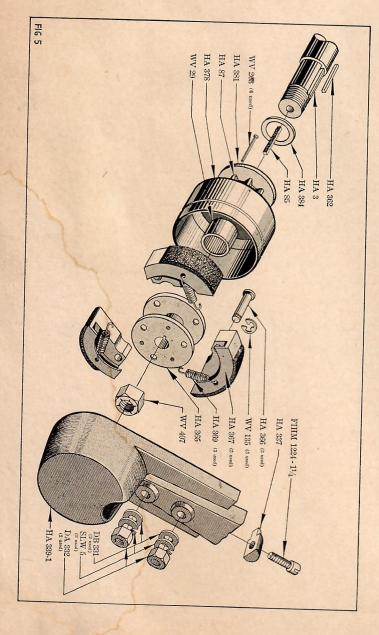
REAR HANDLE ASSEMBLY FIG. 5 - CLUTCH ASSEMBLY
